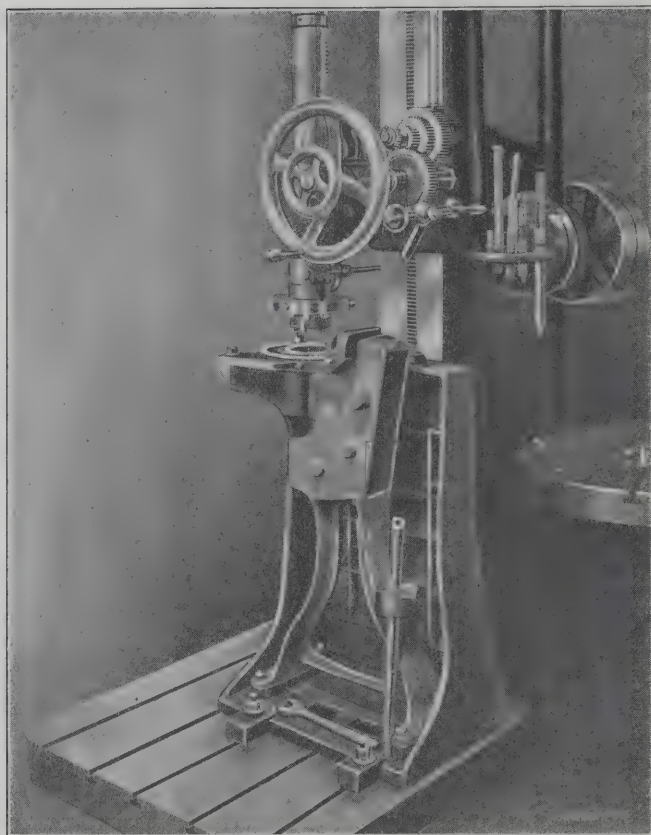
Machining the Holes and Cylindrical Surfaces about the Axis of the Bowl and Spindle
